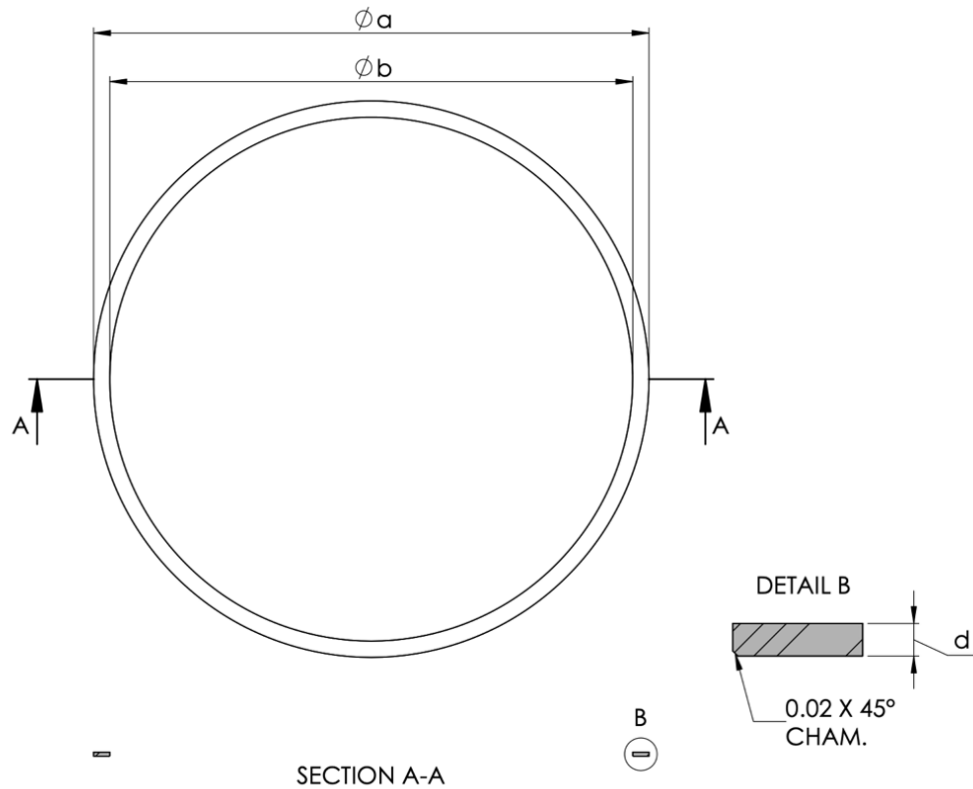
Drawing of the 0-BOTCAP and 0-CAP parts (in inches).
